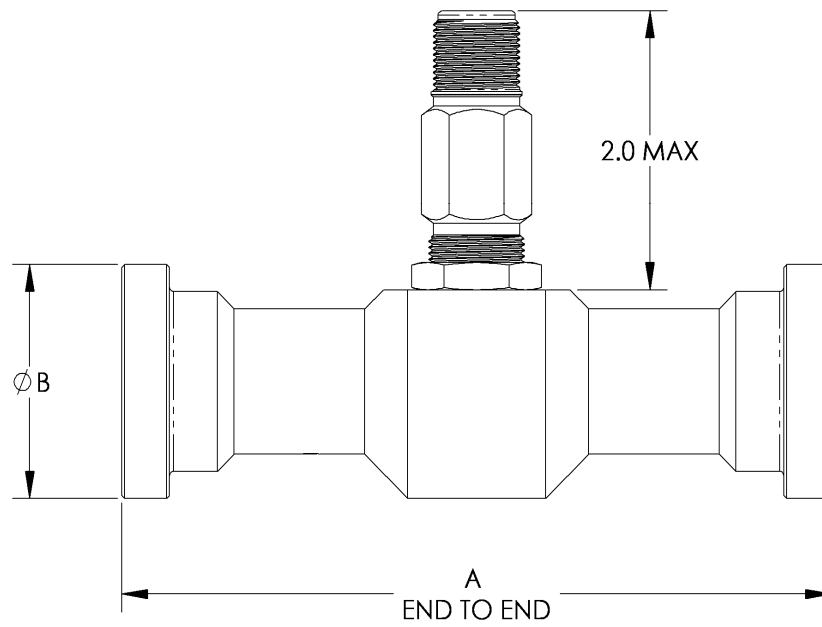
Overall Dimensions, SAE Code 62 End Fitting
